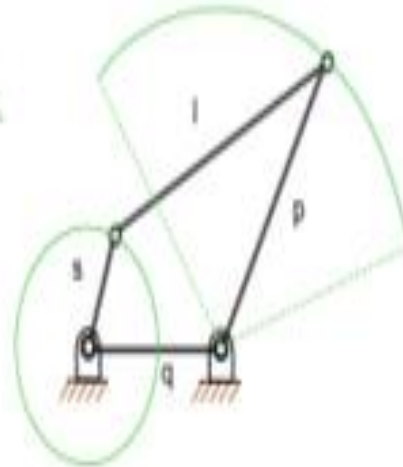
illustrates the working of a simple lever and bell crank lever and Fig. 3.13 shows the four-bar mechanism and its inversion.
